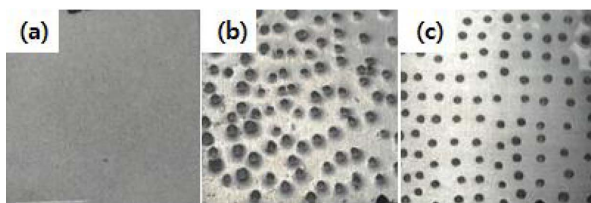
Mechanical surface treatment on Aluminum, (a) sand blasting, (b) punching, (c) punching and surface grinding.
